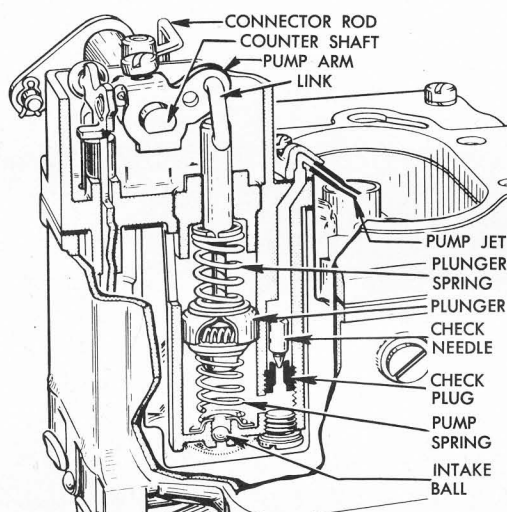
Accelerating System—664S Carter Carburetor (Series 70)
